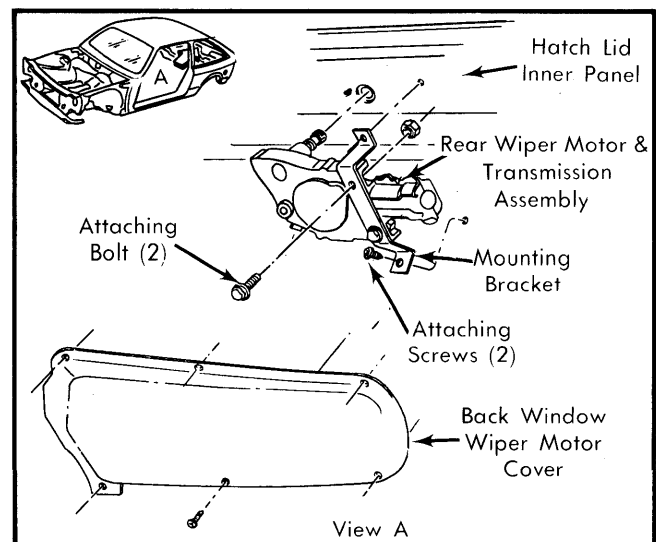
Removal & Installation of General Motors Liftgate Wiper Motor
